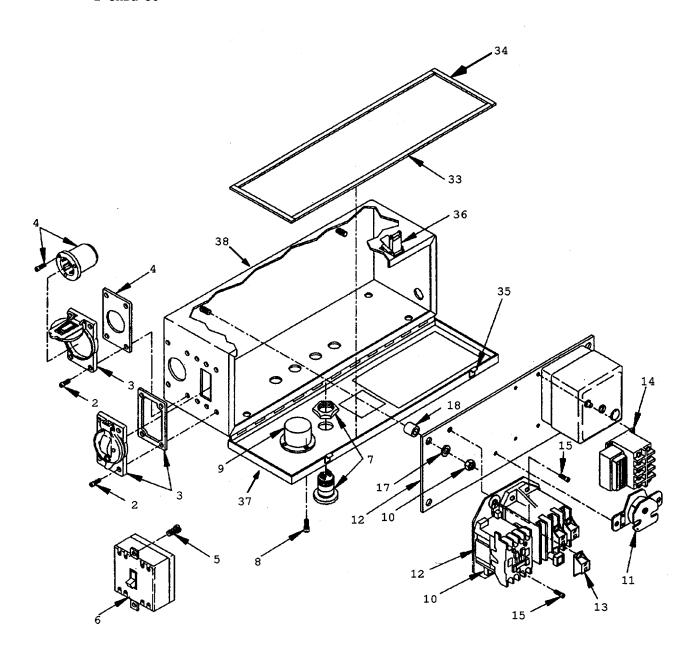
ELECTRIC CONTROL BOX ASSEMBLY (SHEET 1 OF 2)
